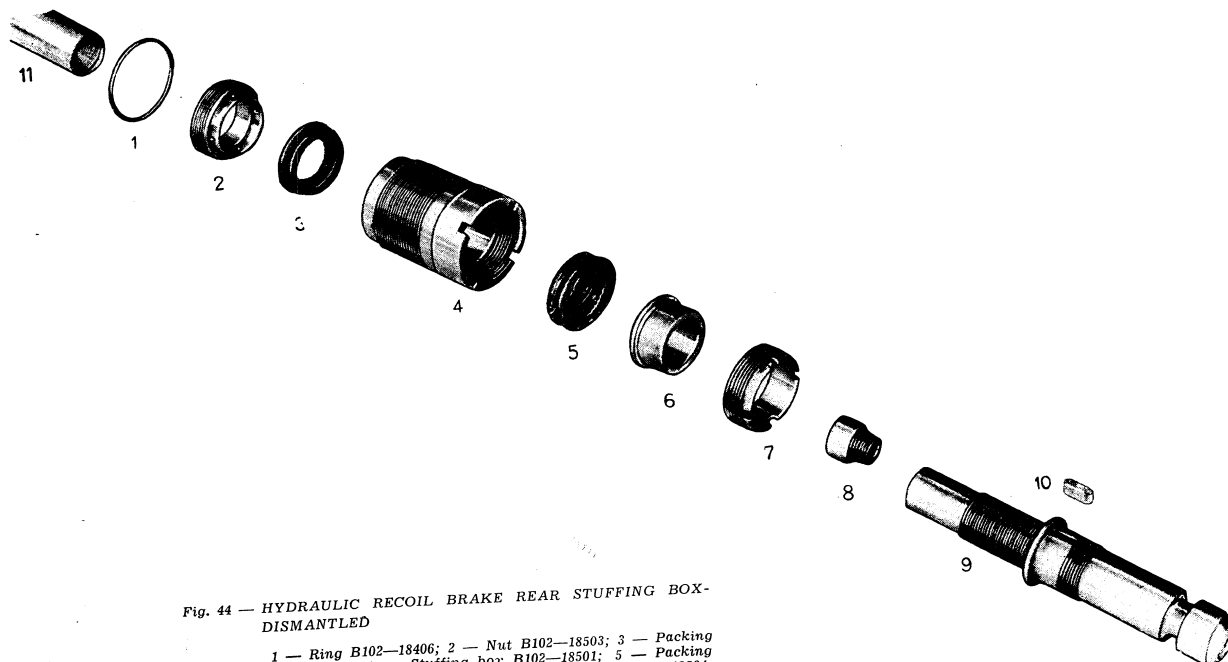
HYDRAULIC RECOIL BRAKE REAR STUFFING BOX-DISMANTLED
